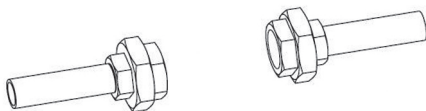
Meter Mounting Diagrammatic Sketch 1
